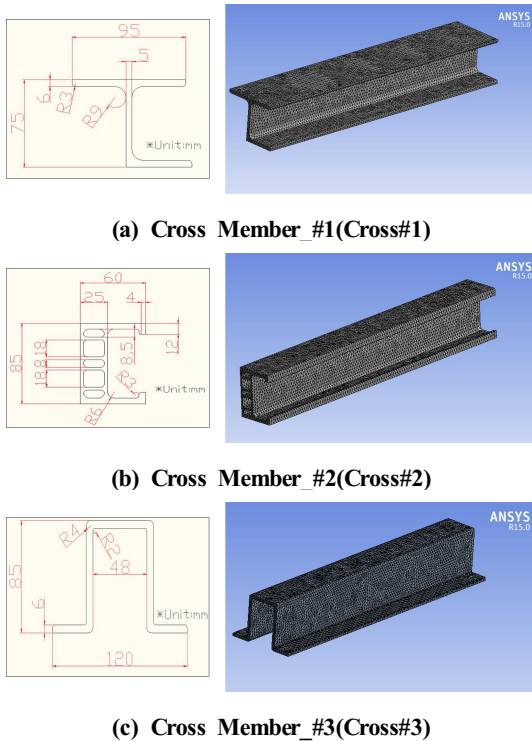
FEM Model and Cross-Sectional shape of Cross Member
